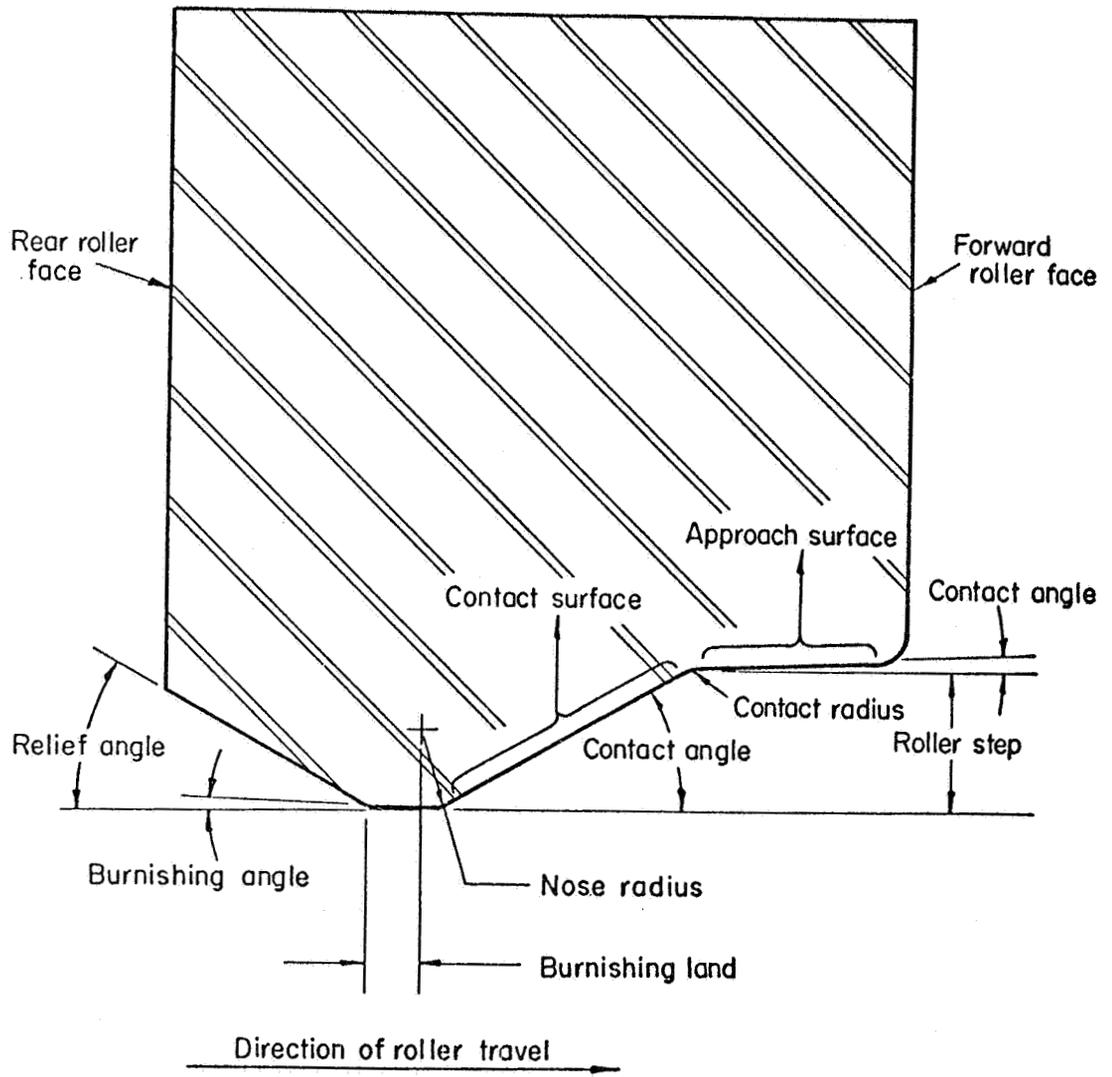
ROLLER CONFIGURATION FOR SHEAR FORMING (Ref. 95)
